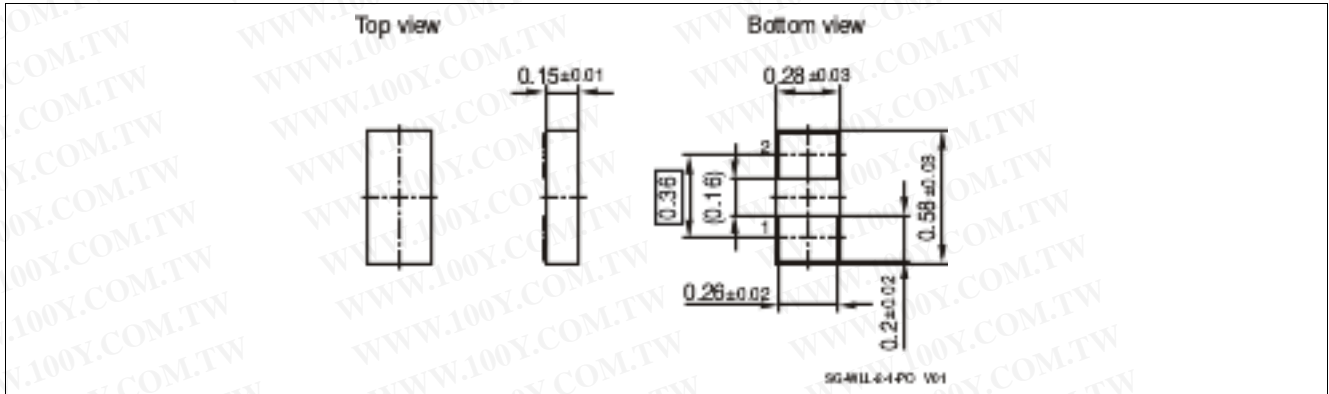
WLL-2-1 Package outline (dimension in mm)
